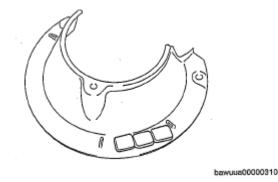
Identifying Magnets Of Oil Reservoir Lock Plate Courtesy of MAZDA MOTORS CORP.
